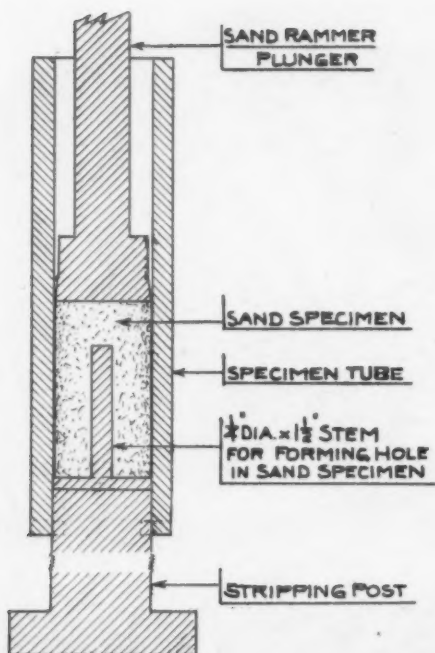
VIEW OF SPECIMEN CONTAINER AND PATTERN USED FOR PENETRATION DEFECT TEST.
